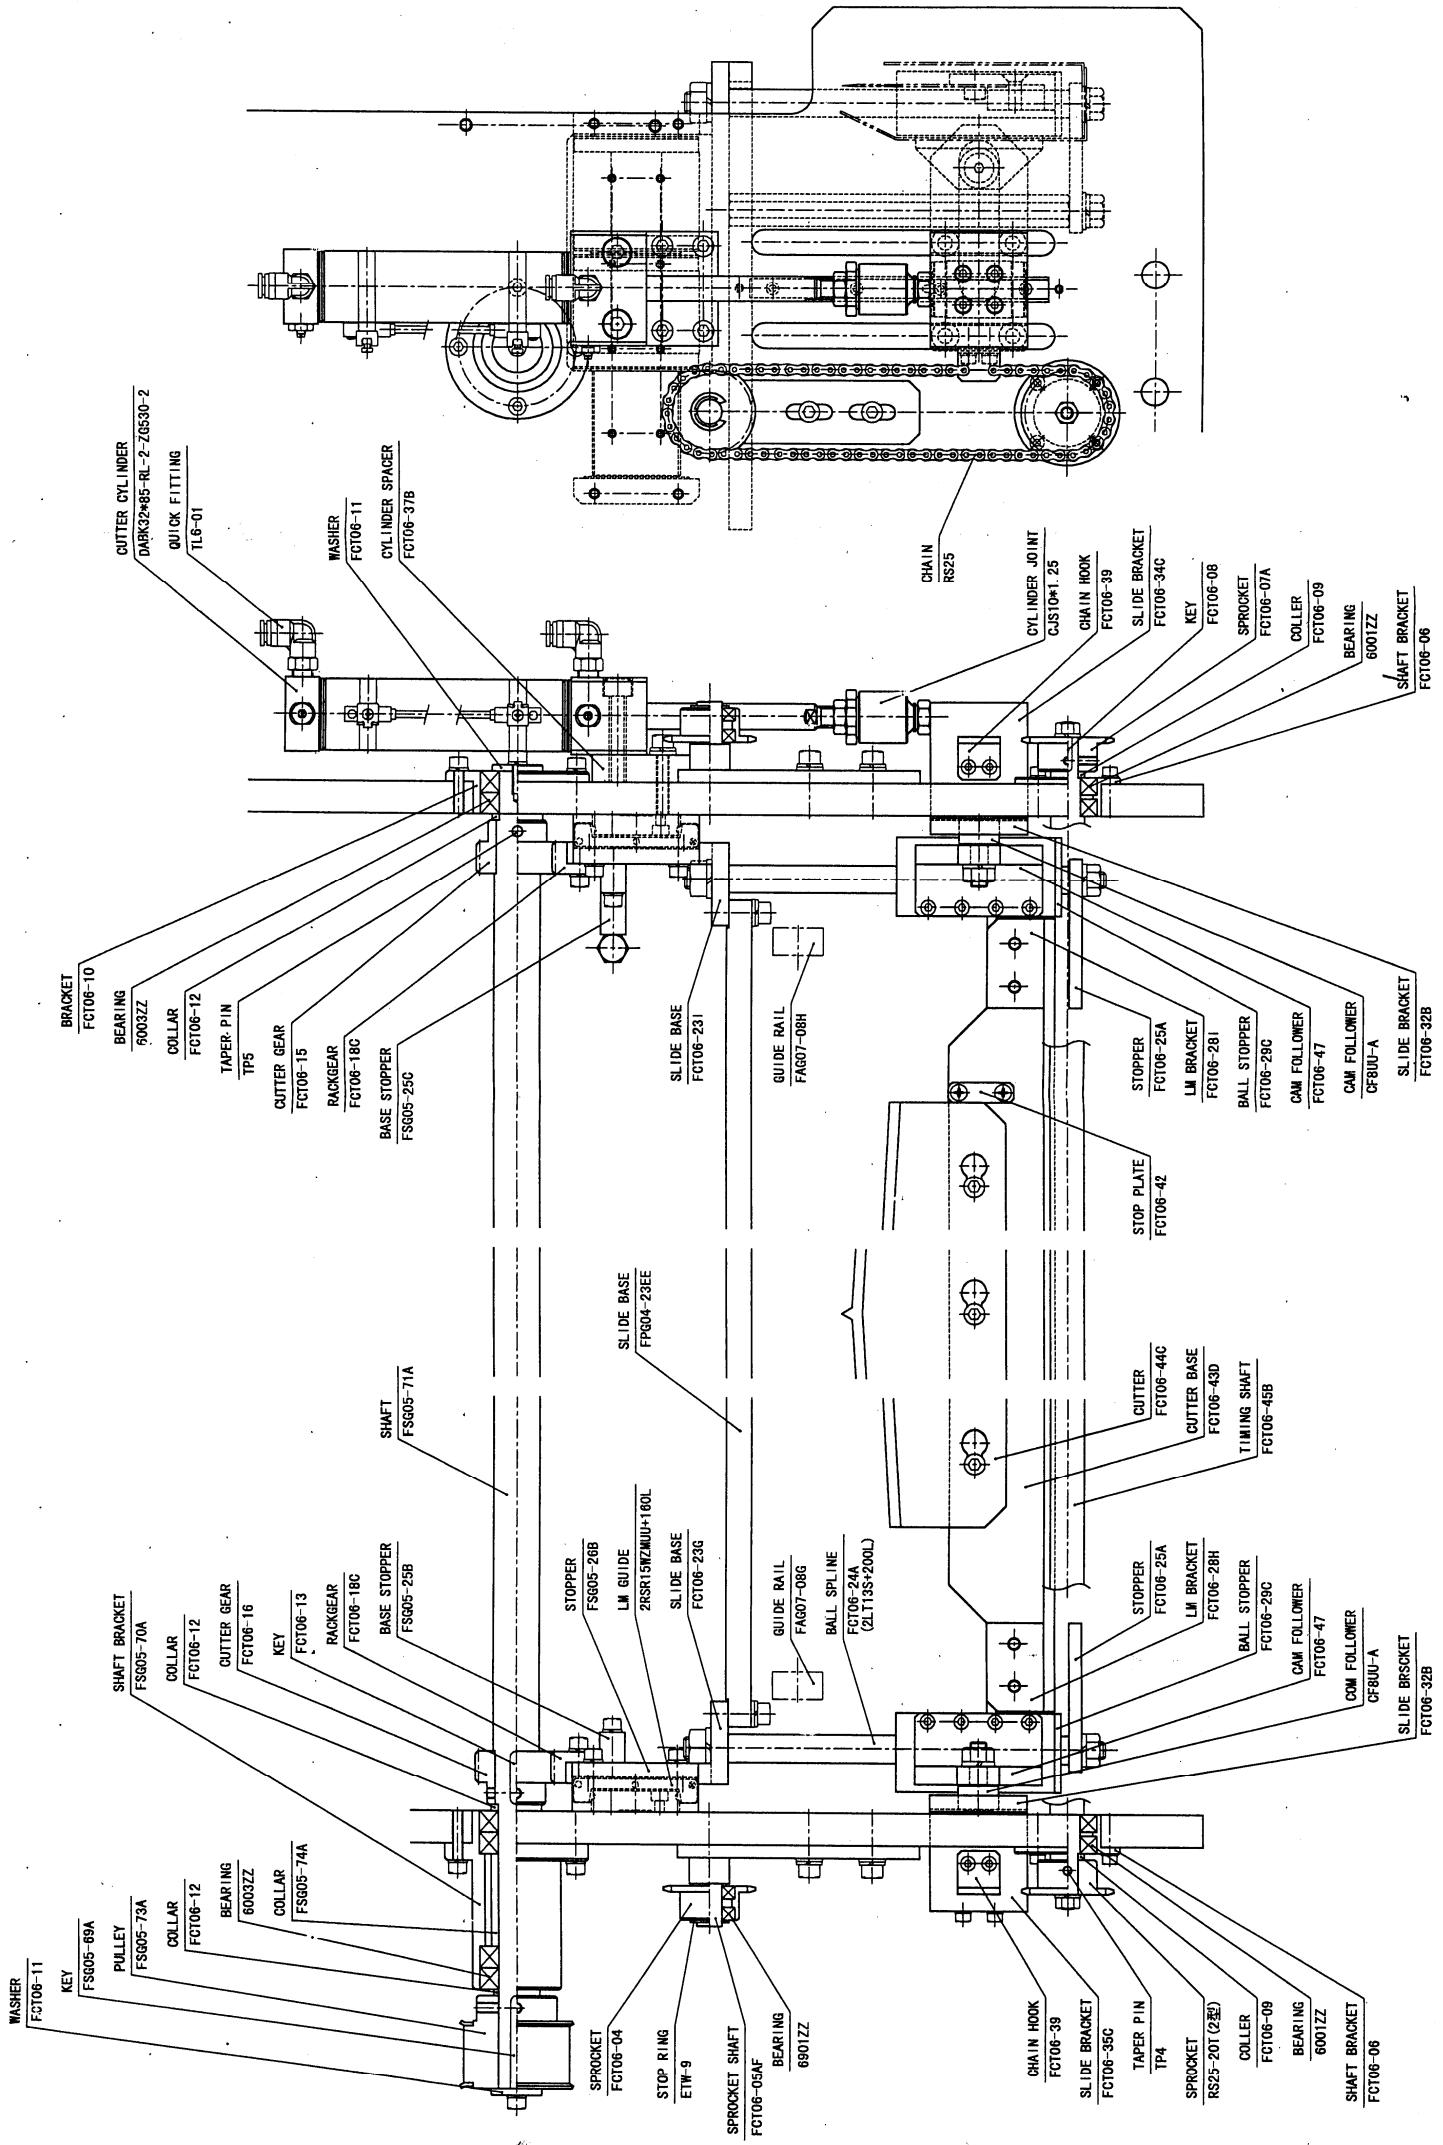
FILM CUTTER SECTION, UPPER SIDE
